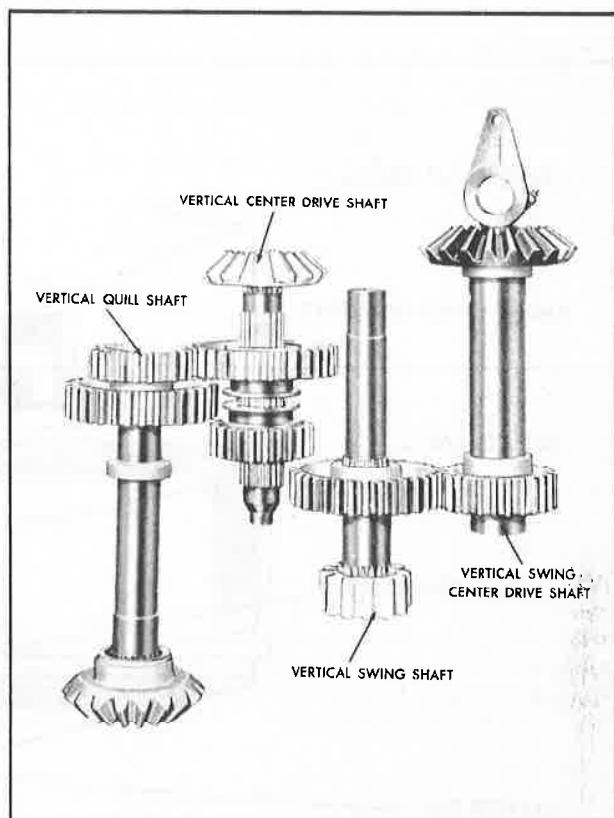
VERTICAL SHAFT ASSEMBLIES
